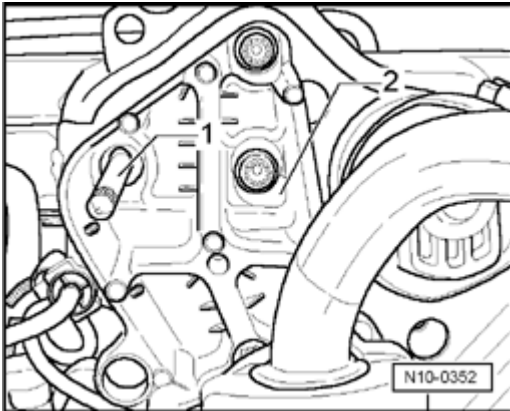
Engine Carrier, Bolts And Mounting Pins VAS 6131/1-6
